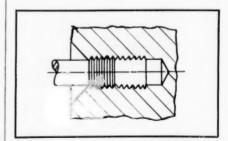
In this design, the threaded hole is countersunk and the tip of the screw is left as originally chamfered; namely, 45 degrees per side.
